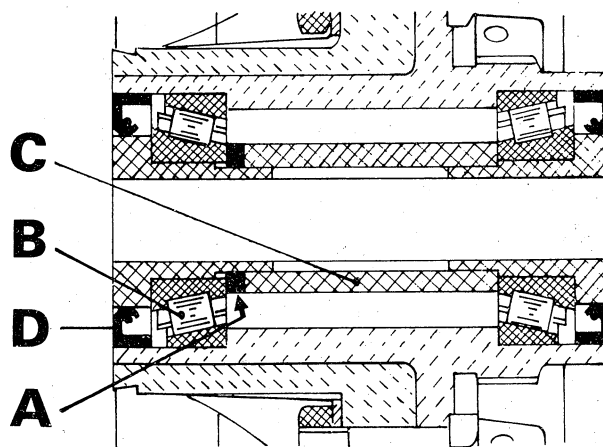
Rear wheel bearing adjustment - 750S and 850T
